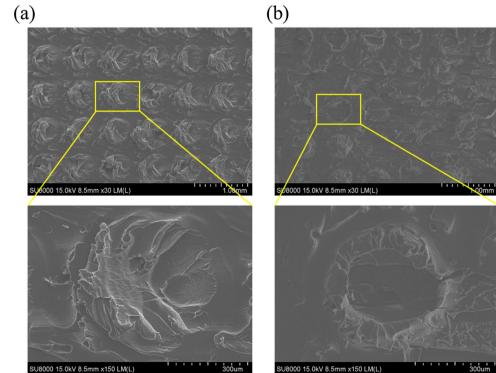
Fracture plane on the metal surface (specimen D0.5) after a shear and b normal tensile testing
